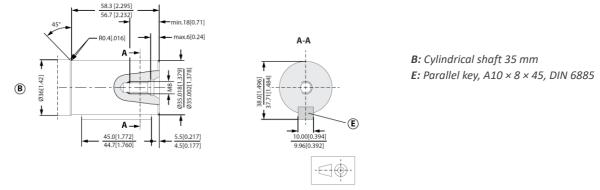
OMH shaft version: Cylindrical shaft 35 mm; Parallel key, A10 \times 8 \times 45, DIN 6885
